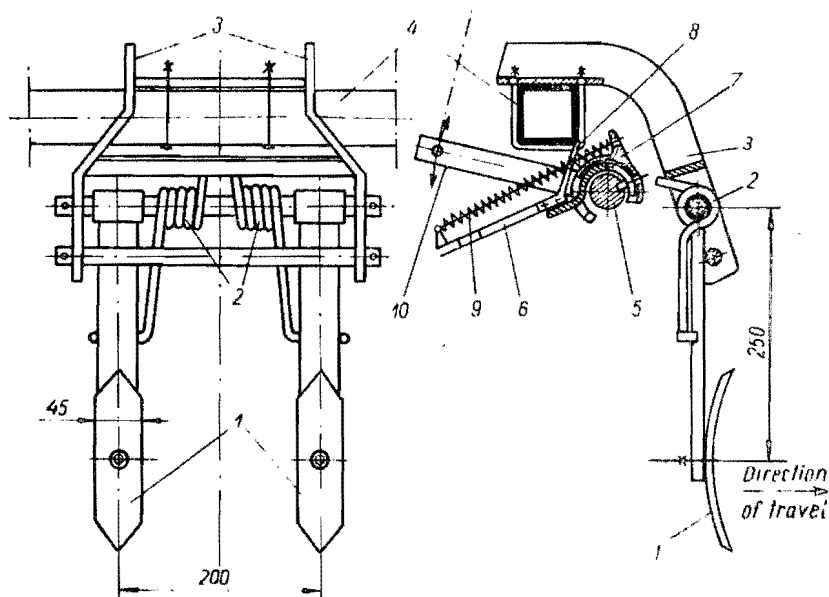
Example of tractor-track scarifiers (rippers) attached to a mounted drill: 1—scarifying (ripping) hoes; 2—springs; 3—ripper arms; 4—drill frame; 5—lever bar; 6—opener lever; 7—handle of lever enabling movement of openers in vertical plane and damped by buffer; 8-9—spring pressing the opener lever; 10—lever turning the handle 7 and thus limiting opener's deflection.
